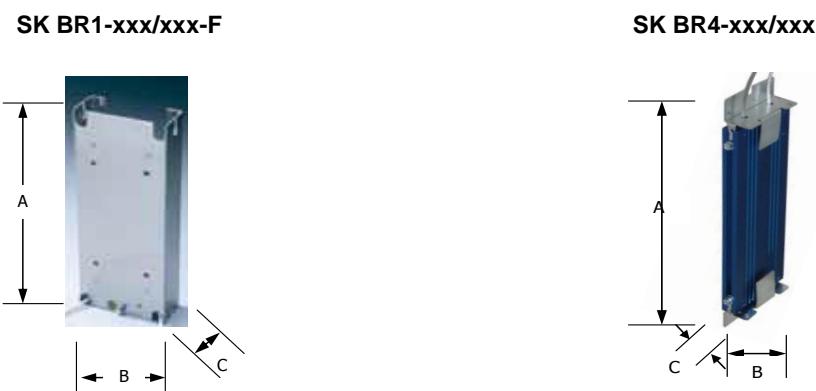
Dimensions of footprint braking resistors SK BR1/xxx/xxx-F and SK BR4-xxx/xxx
